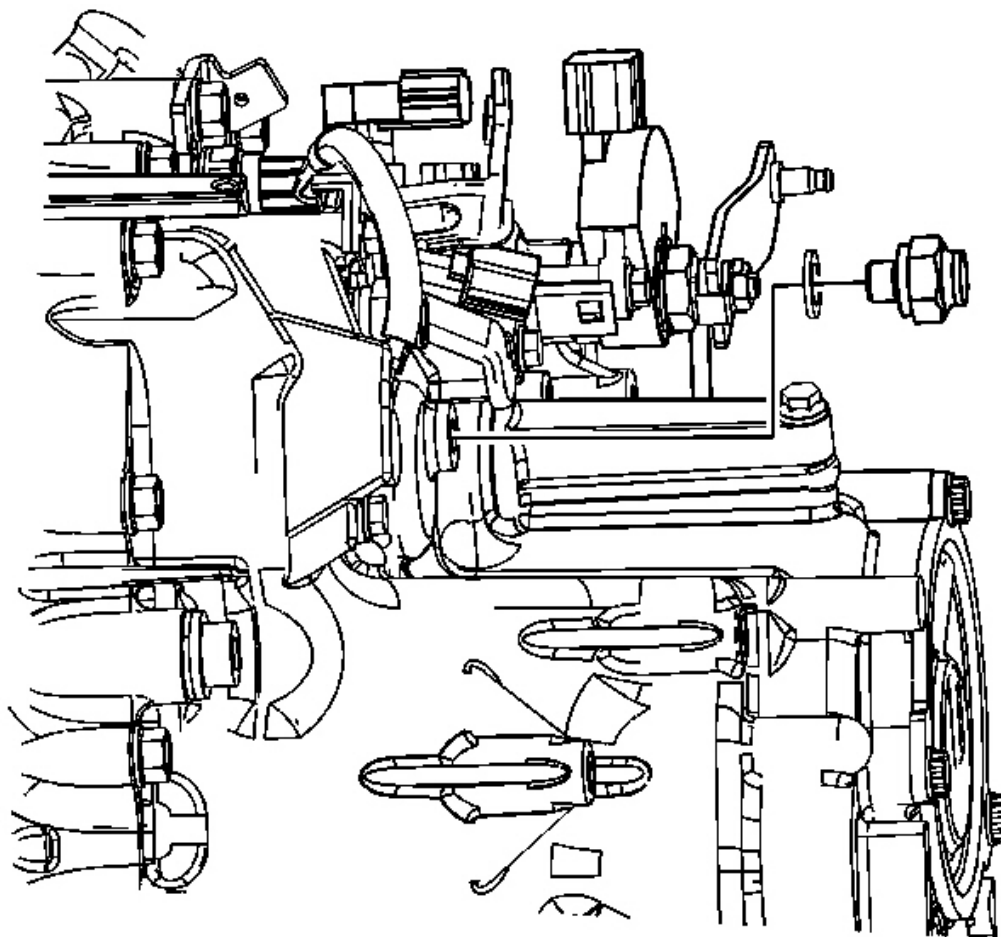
Removing Oil Cooler Pipe Fitting & Seal
